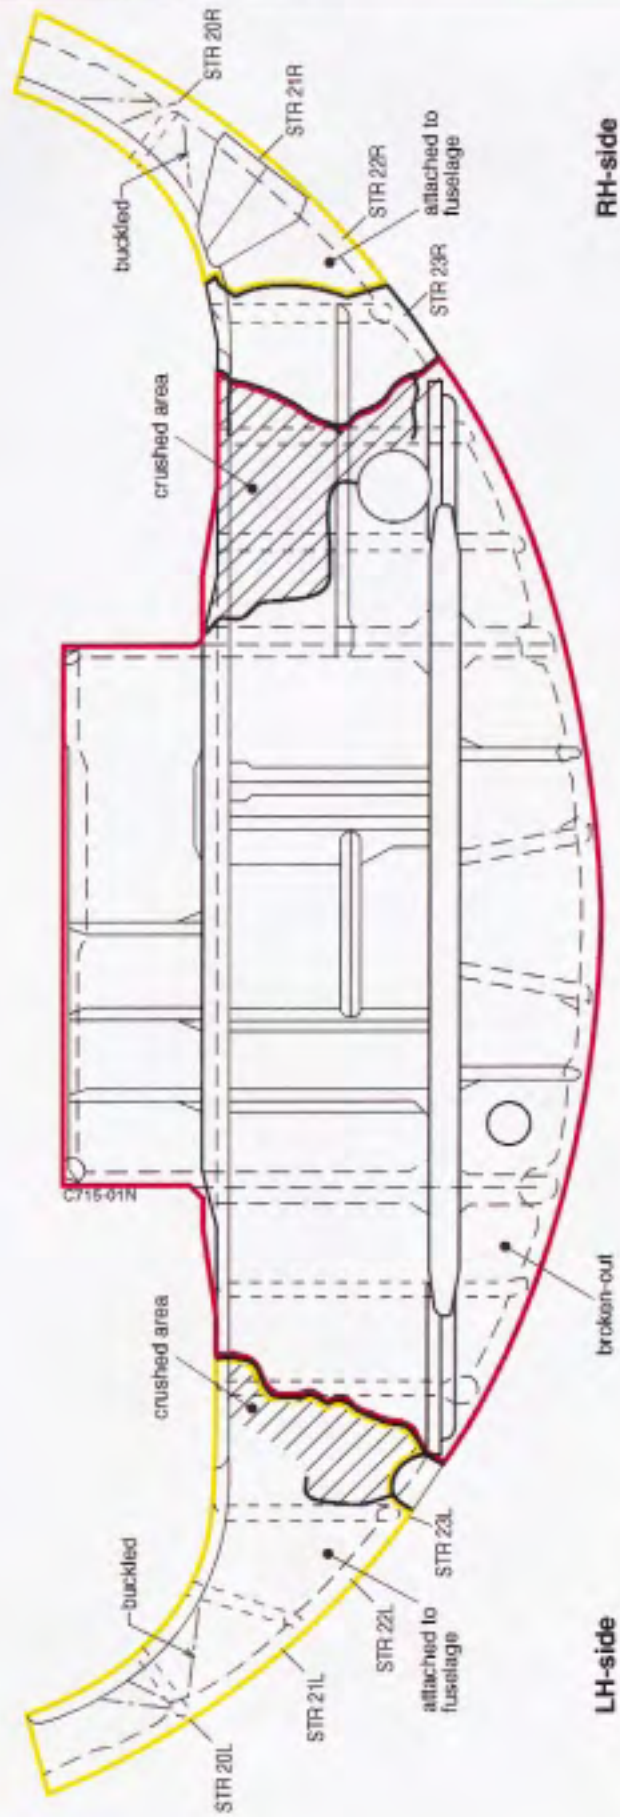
Schematic of the lower STA 395 bulkhead with web fracture locations indicated
